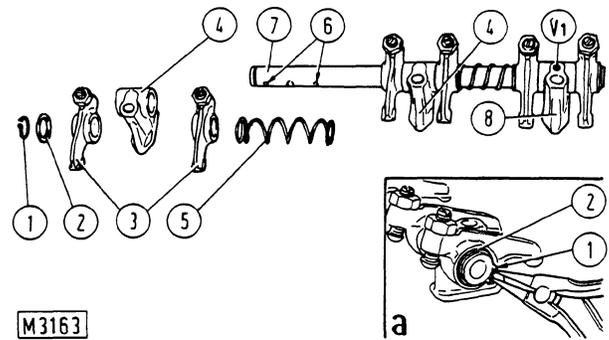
Removing (installing) retaining clip (a) and dismantled parts of a rocker arm shaft.
